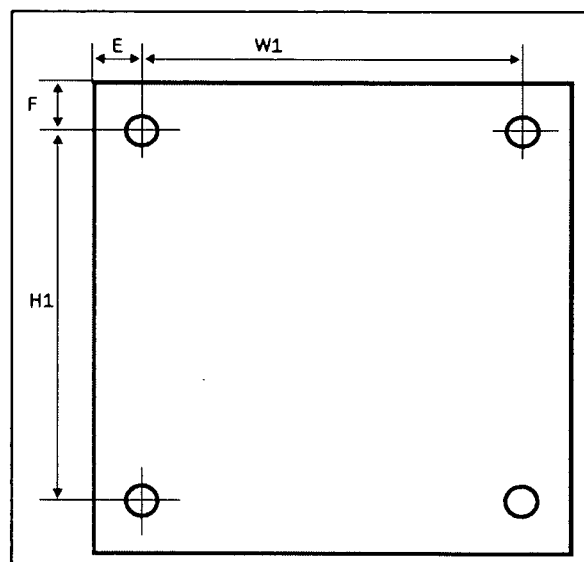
Hole pattern for screw attachment, MSF-310 to MSF-835. Hole distance (mm).
